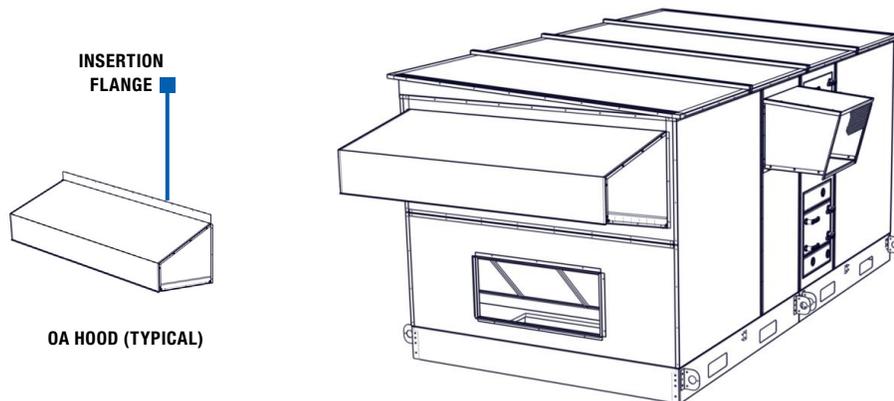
OUTSIDE AIR HOOD (TYPICAL)
